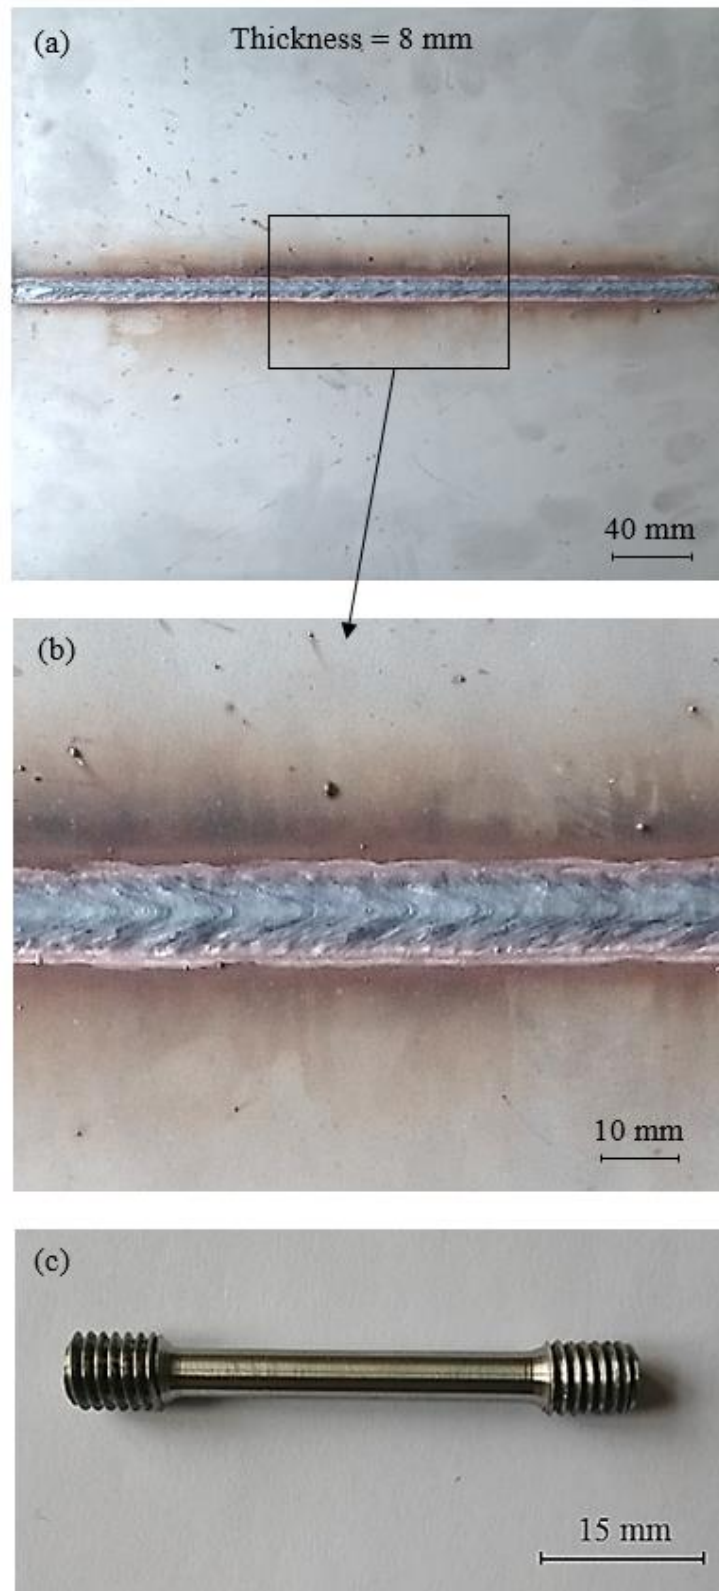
(a) Welded steel plates, (b) weld metal cut tensile plane and (c) tensile test specimen.
